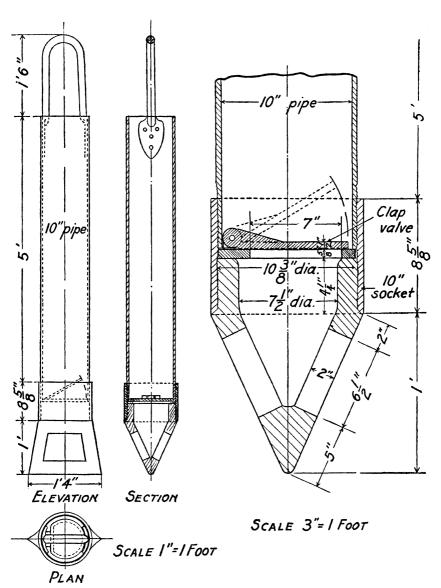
A short chisel-bottom bailer designed by the engineering department, Sarawak Oil Field, Ltd., Miri, Sarawak. This drill should be a good one, but is expensive to make and requires six men to handle effectively.
